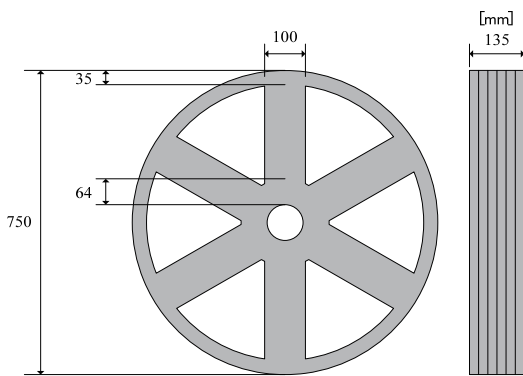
Shape and dimensions of 6.6 kV-100 kVA concentric-winding type three-phase variable inductor.
